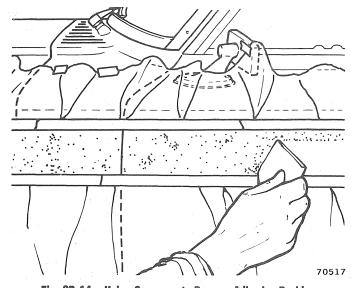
P-14 Using Squeegee to Remove Adhesive Residue
